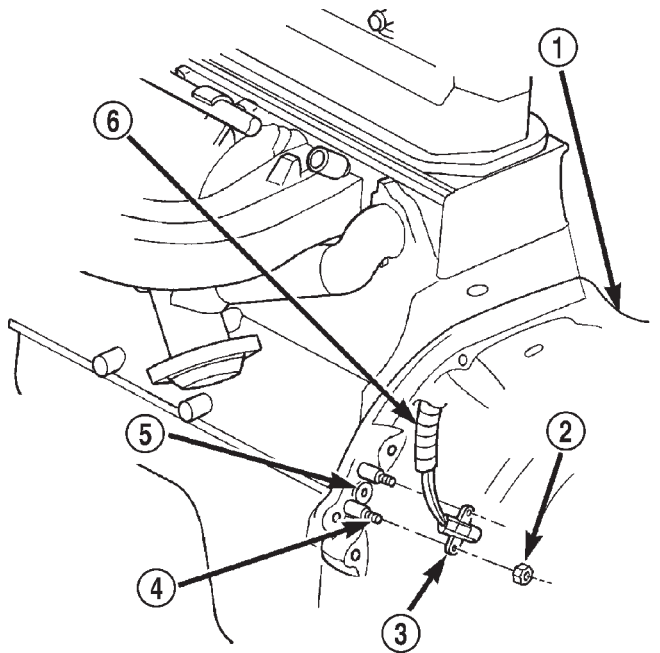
Crankshaft Position Sensor—Two-Nut Mounting
